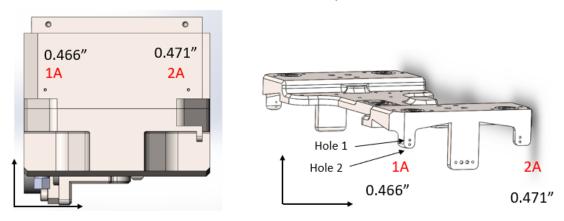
Tank and Manifold Solar Panel Mounting Hole Locations
